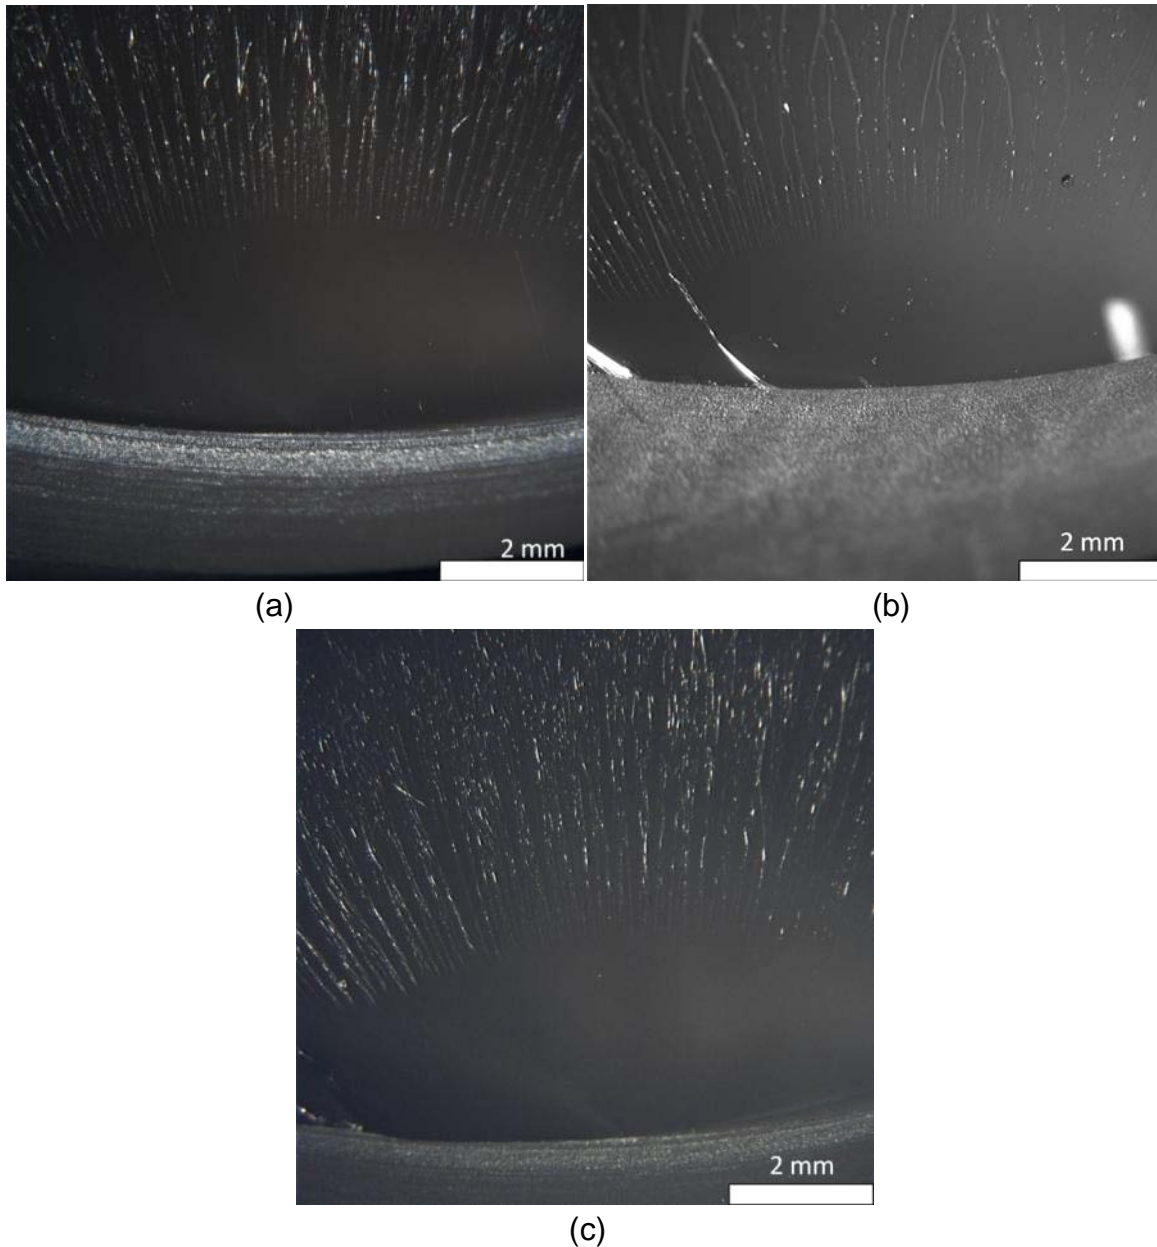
Images showing fracture surfaces of (a) GB3-6, (b) GB4-1, and (c) GB4-4.
